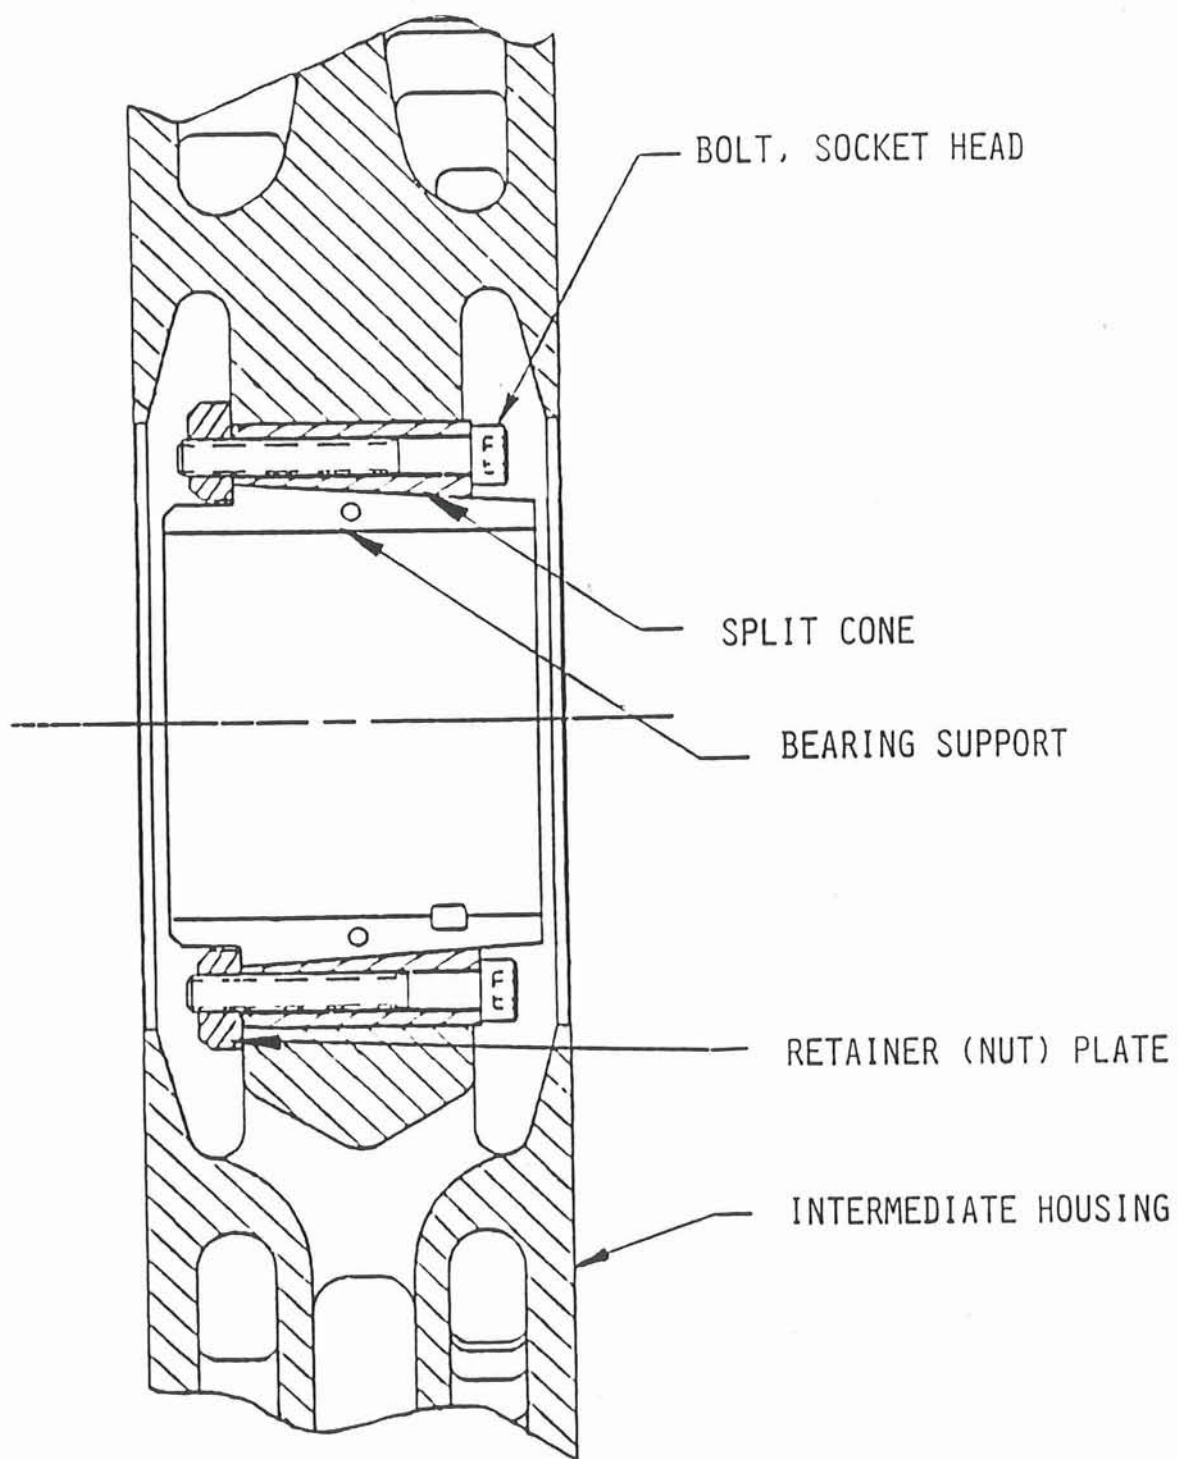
Center Main Bearing and Support Assembly
